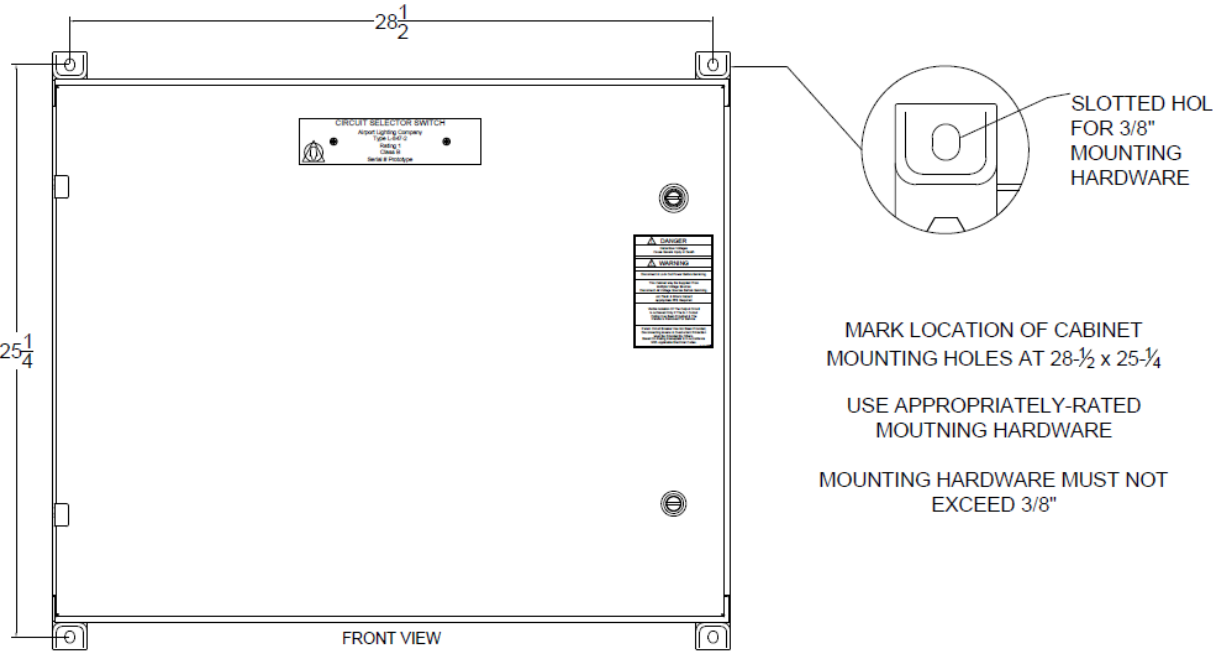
847-3,4-x-x-xxx Mounting Dimensions
